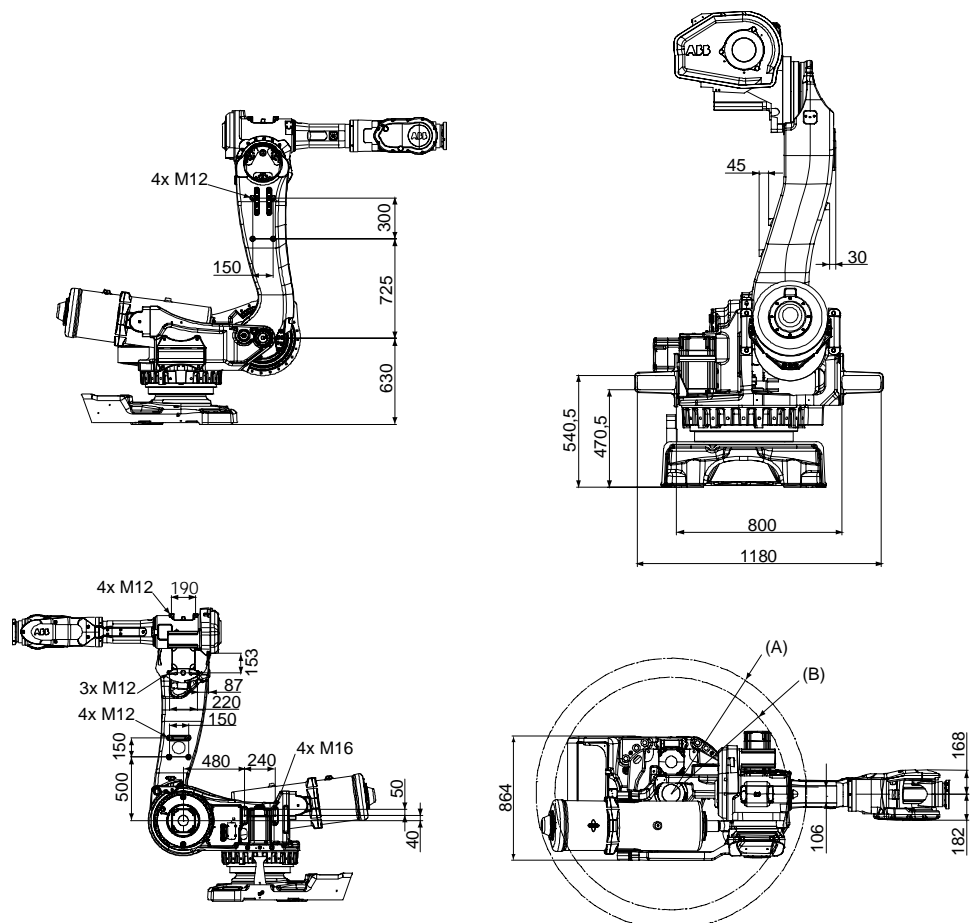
Holes for mounting extra load on upper arm on IRB 6650S (dimensions in mm).
